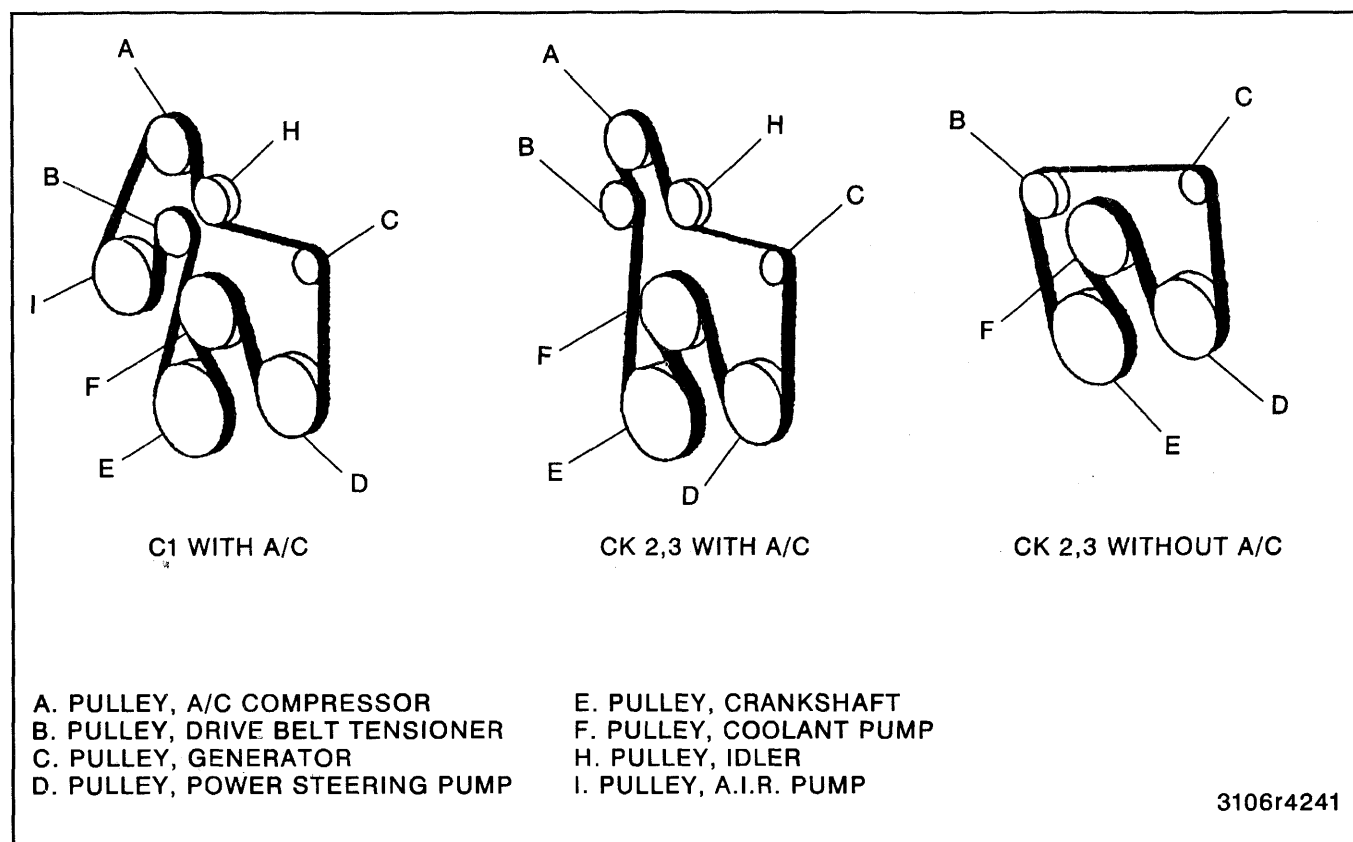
Multiple Rib Drive Belt Routing (C1, C/K 2,3 with 7.4L Engine)
